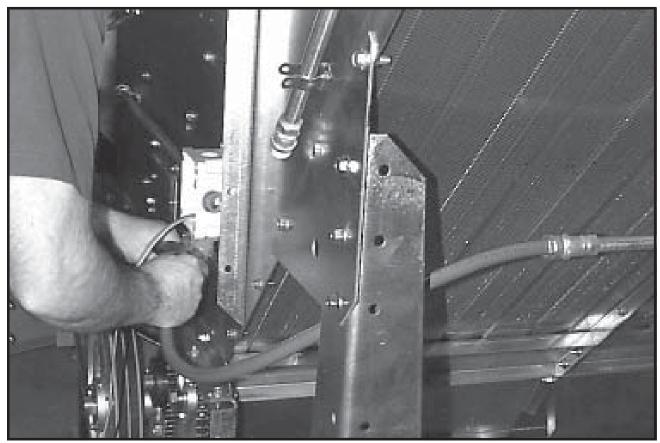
Front view - Flex conduit and wires for discharge switch located at rear of dryer.
